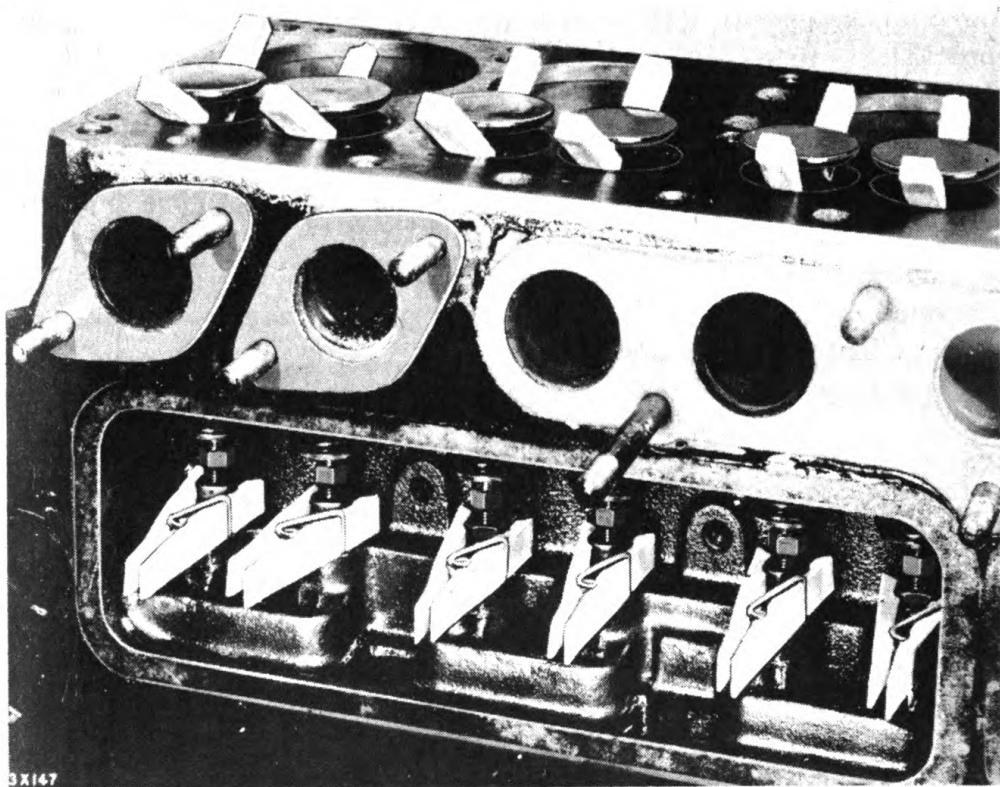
A—Holding Up Valves and Tappets for Camshaft Removal
